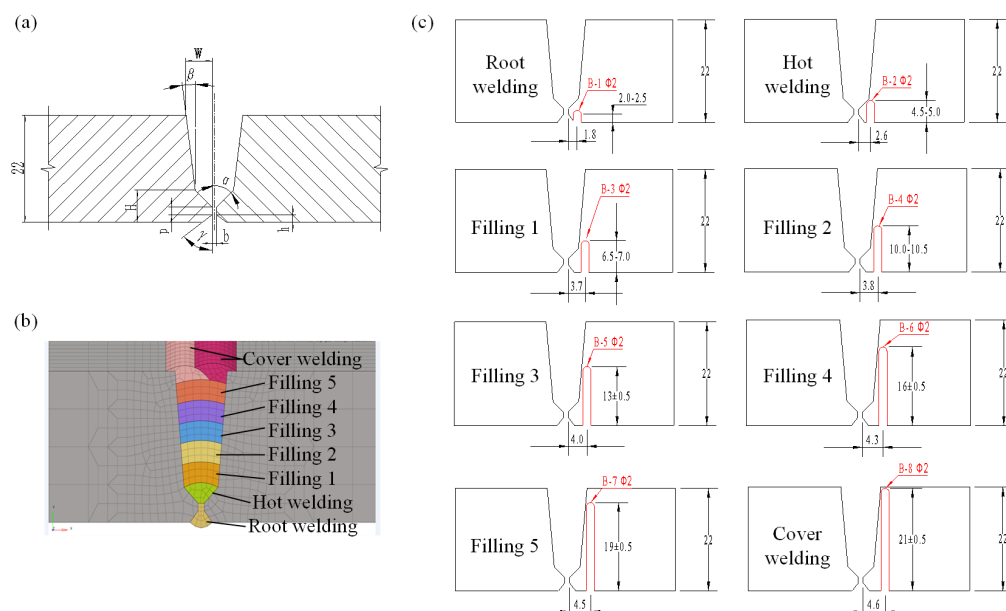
Schematic diagram of the weld groove morphology, welding sequence, and measurement points of the welding thermal cycle curve: (a) weld groove morphology, (b) welding sequence, (c) measurement points of the welding thermal cycle curve.
